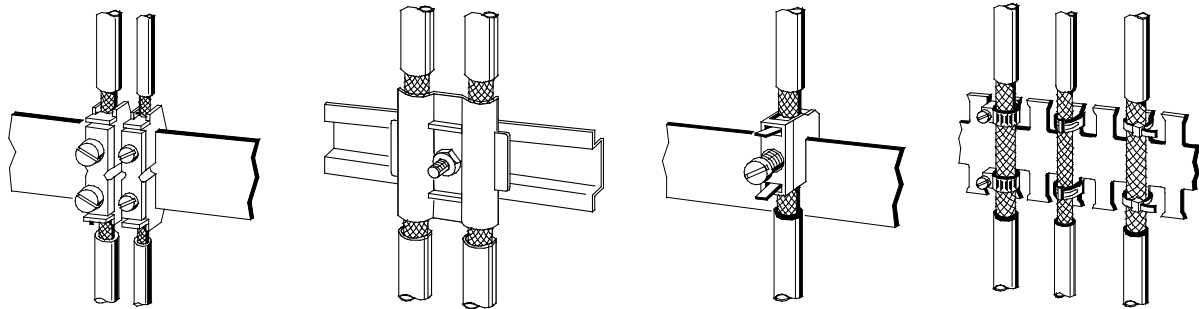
Fixing Shielded Cables with Various Types of Cable Clamps
